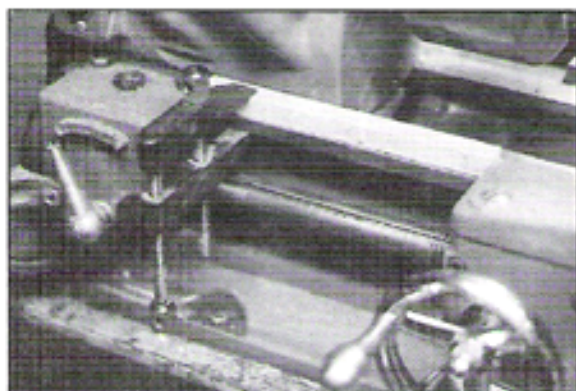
INSTALLING THE CARRIAGE STOP AT THE LATHE HEAD STOCK.
